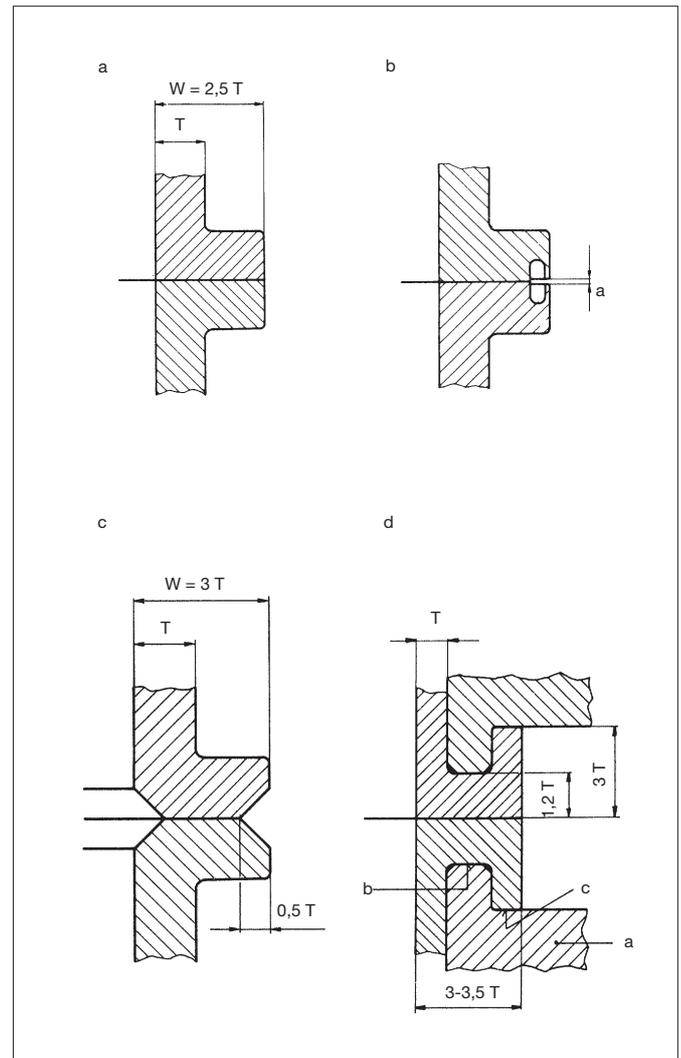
Joint Design for Hot Plate Welding
